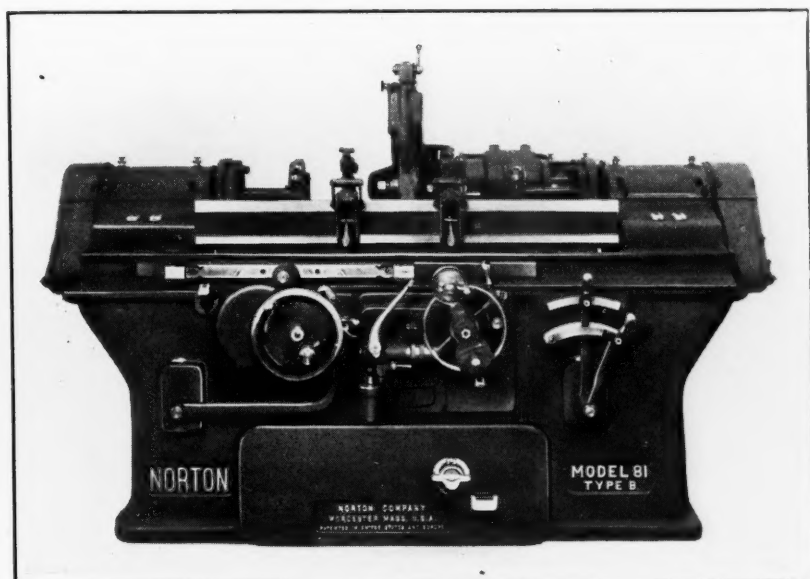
Norton Model 81 Type B Crankpin Grinding Machine
